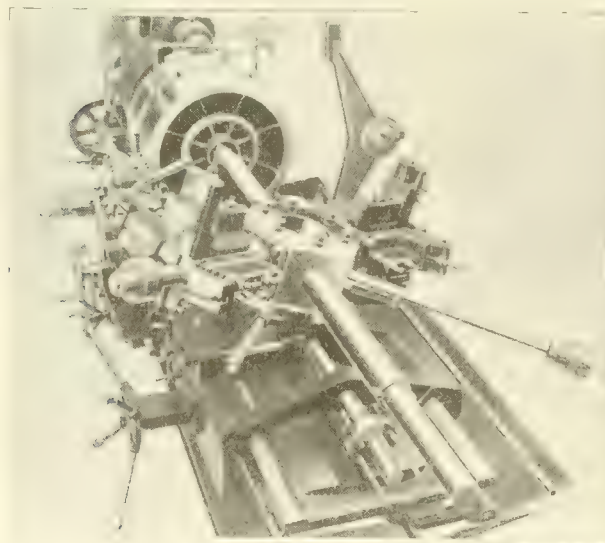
TOP VIEW OF EQUIPMENT USED ON THE FIRST OPERATION OF TRUCK WHEEL SHOWN AT FIG. 1.
